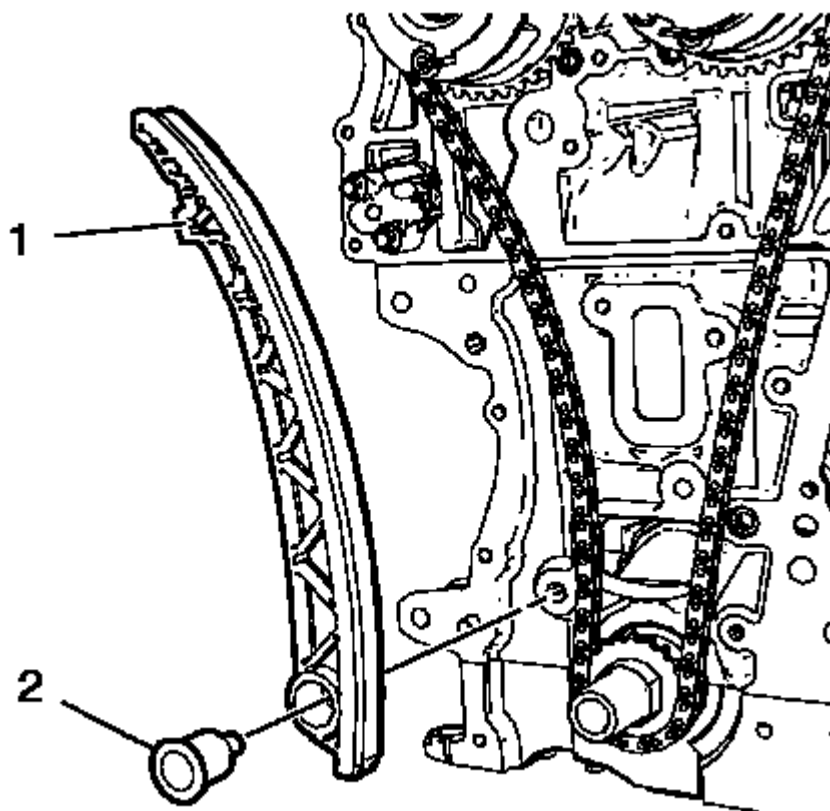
Timing Chain Tensioner Shoe And Bolt
